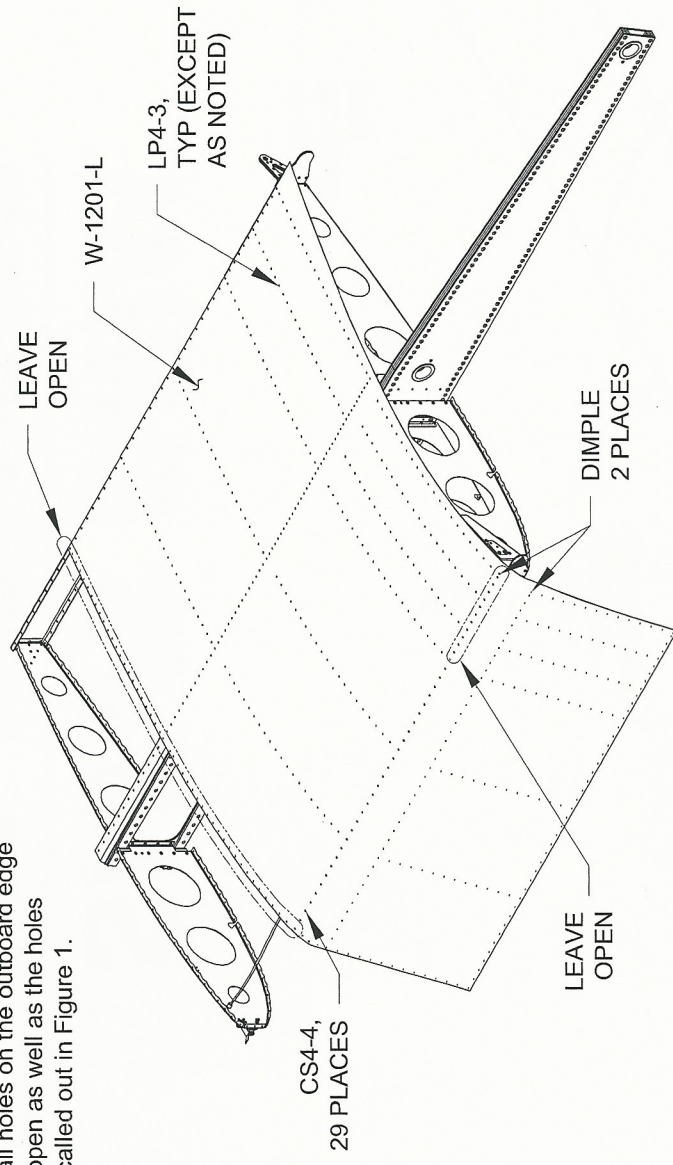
ATTACHING INBD WING SKIN (LEFT WING SHOWN)
